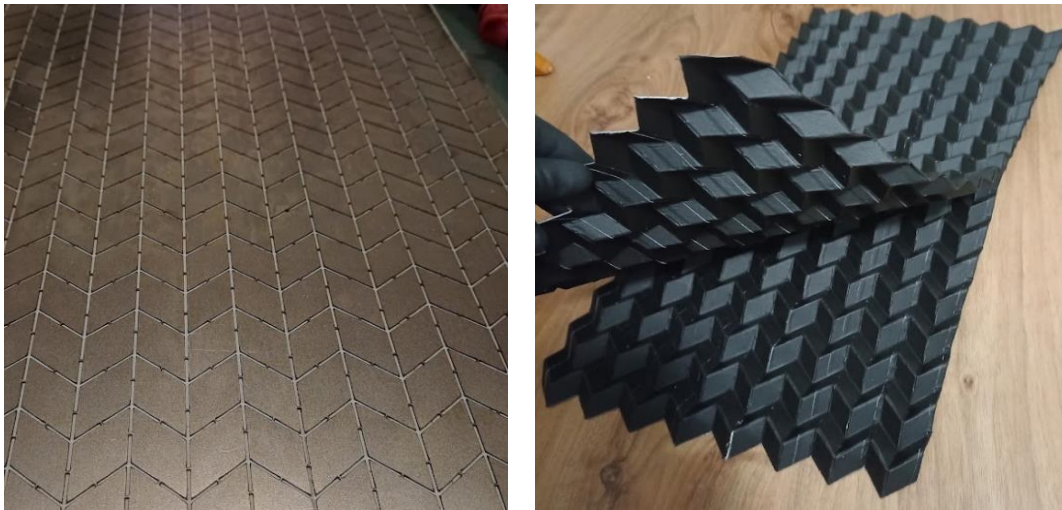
a) Sheet of 0.5 mm thin laser cutted parallelograms
